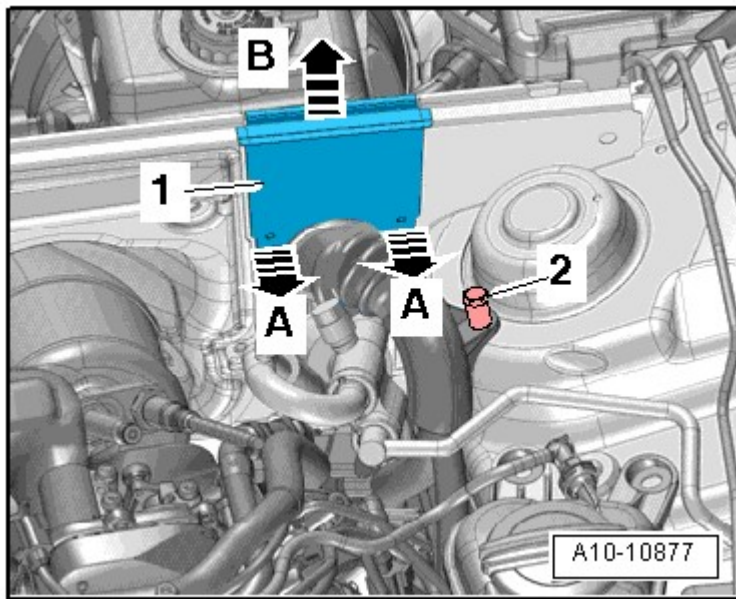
Releasing Retainers To Remove Wiring Bushing
